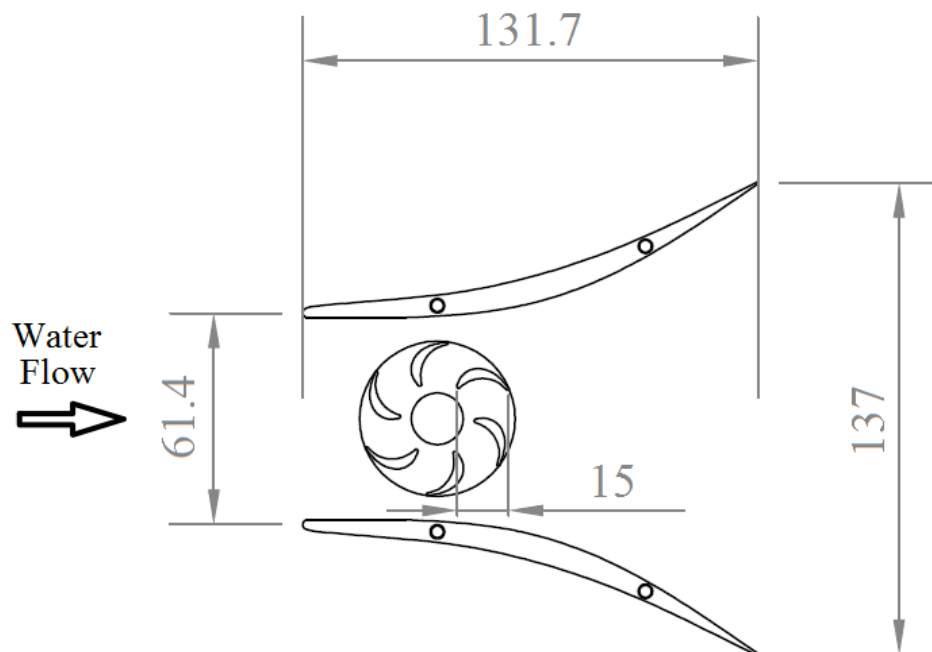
Cross section drawing of the diffuser and the rotor (dimensions are in mm)
